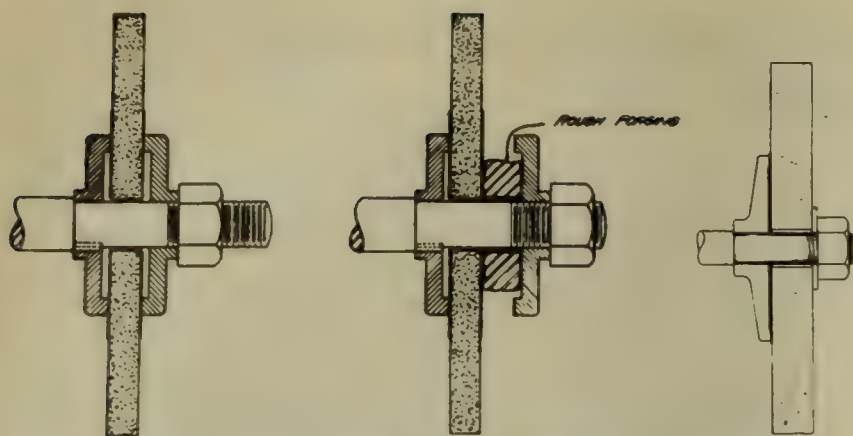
Rough Forging Placed on One Side of Wheel Causing Uneven Side Pressure.
